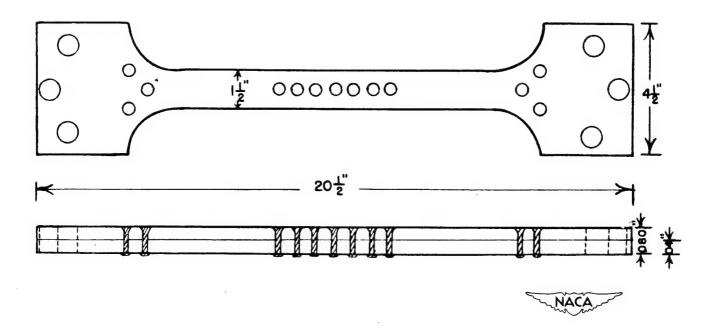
Specimen used for sheet-efficiency tests. (Sheets, 0.040-in. 24S-T Alclad. Rivets, AN 426 AD4-5, spaced $\frac{1}{2}$ in. apart in test section.)
